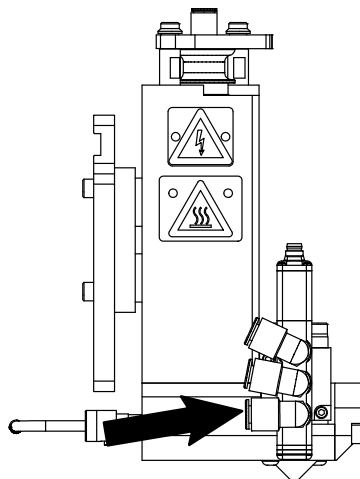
Location of solenoid valve air port used for piston seal test procedure
